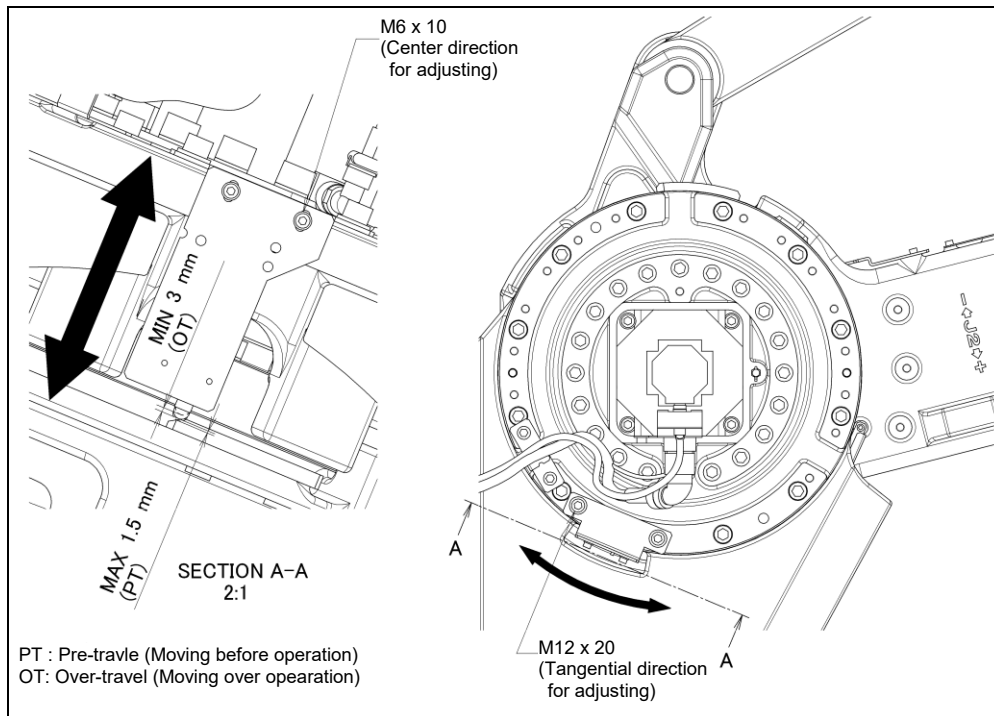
(b) Adjusting J2-axis limit switch (option) (M-900iA/350/260L)
